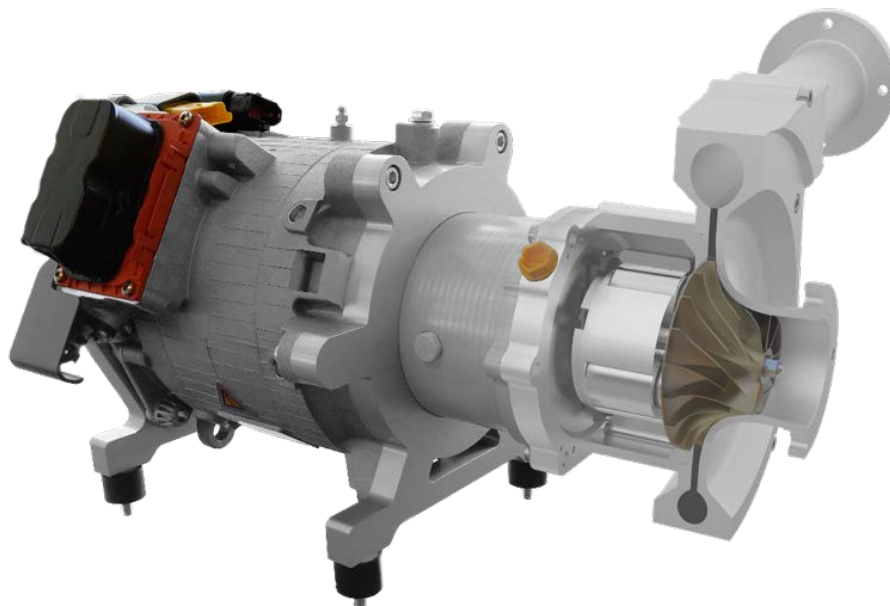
Section view through the prototype of the turbo-compressor including motor and gearbox.
